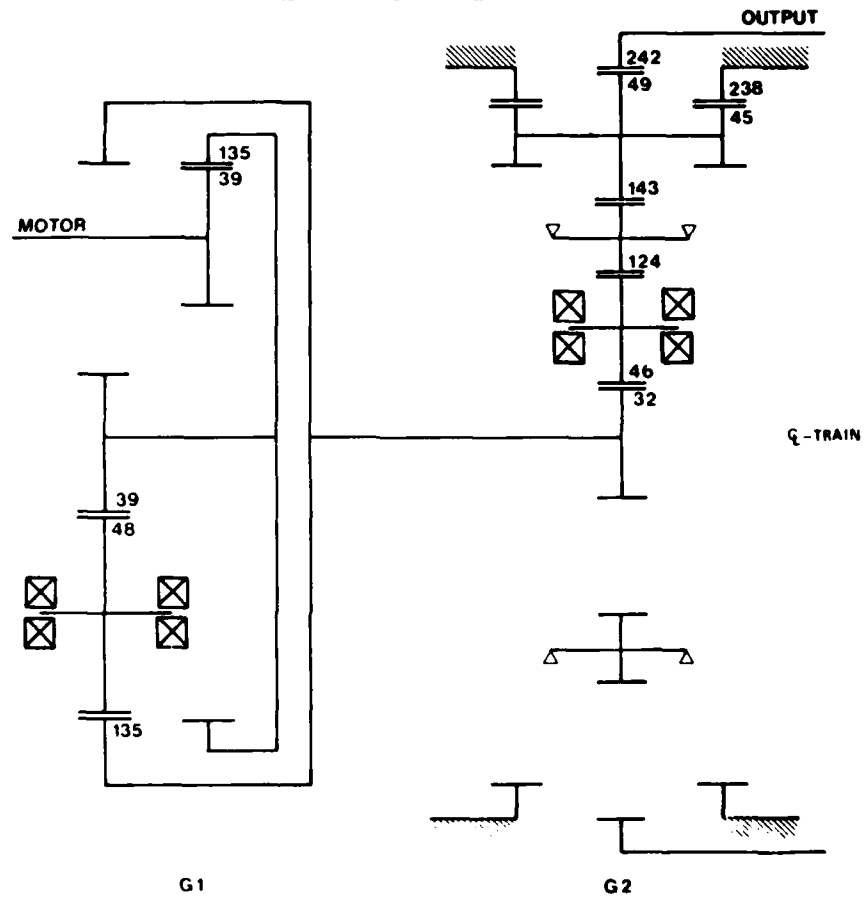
SHOULDER JOINT GEAR SCHEMATIC
